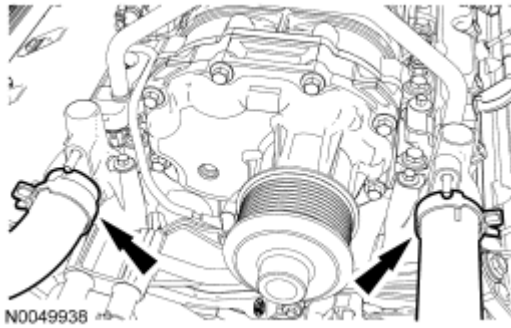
Locating Upper Radiator Hoses From Intake Manifold
